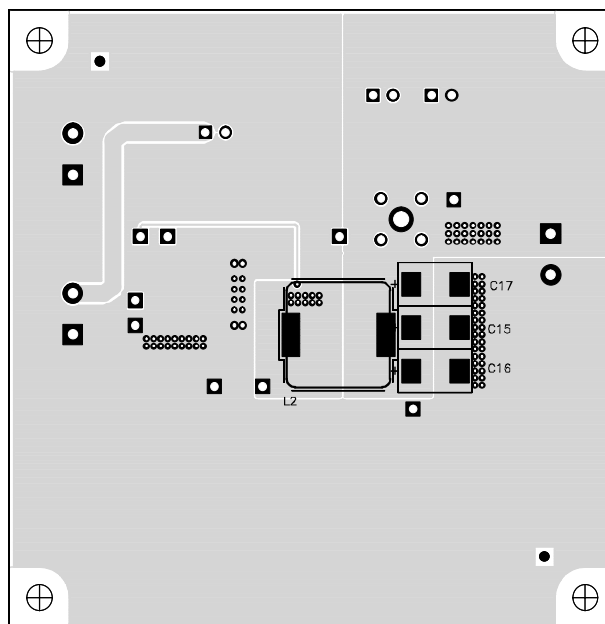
Bottom Side Assembly (Showing Optional Components)
